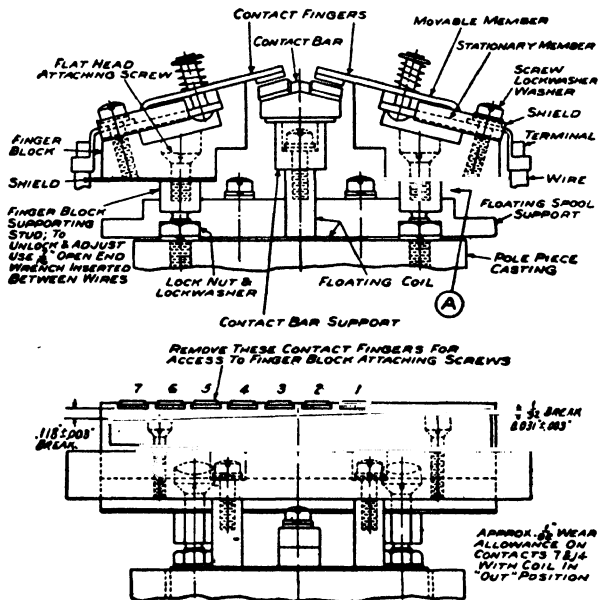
Contact Details With Floating Coil at Inside End of Travel, Voltage Control Relay
